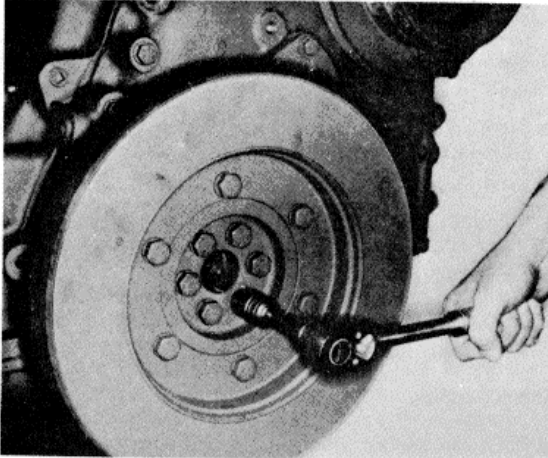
, (N 10093) .Removing vibration damper - Viscous type
